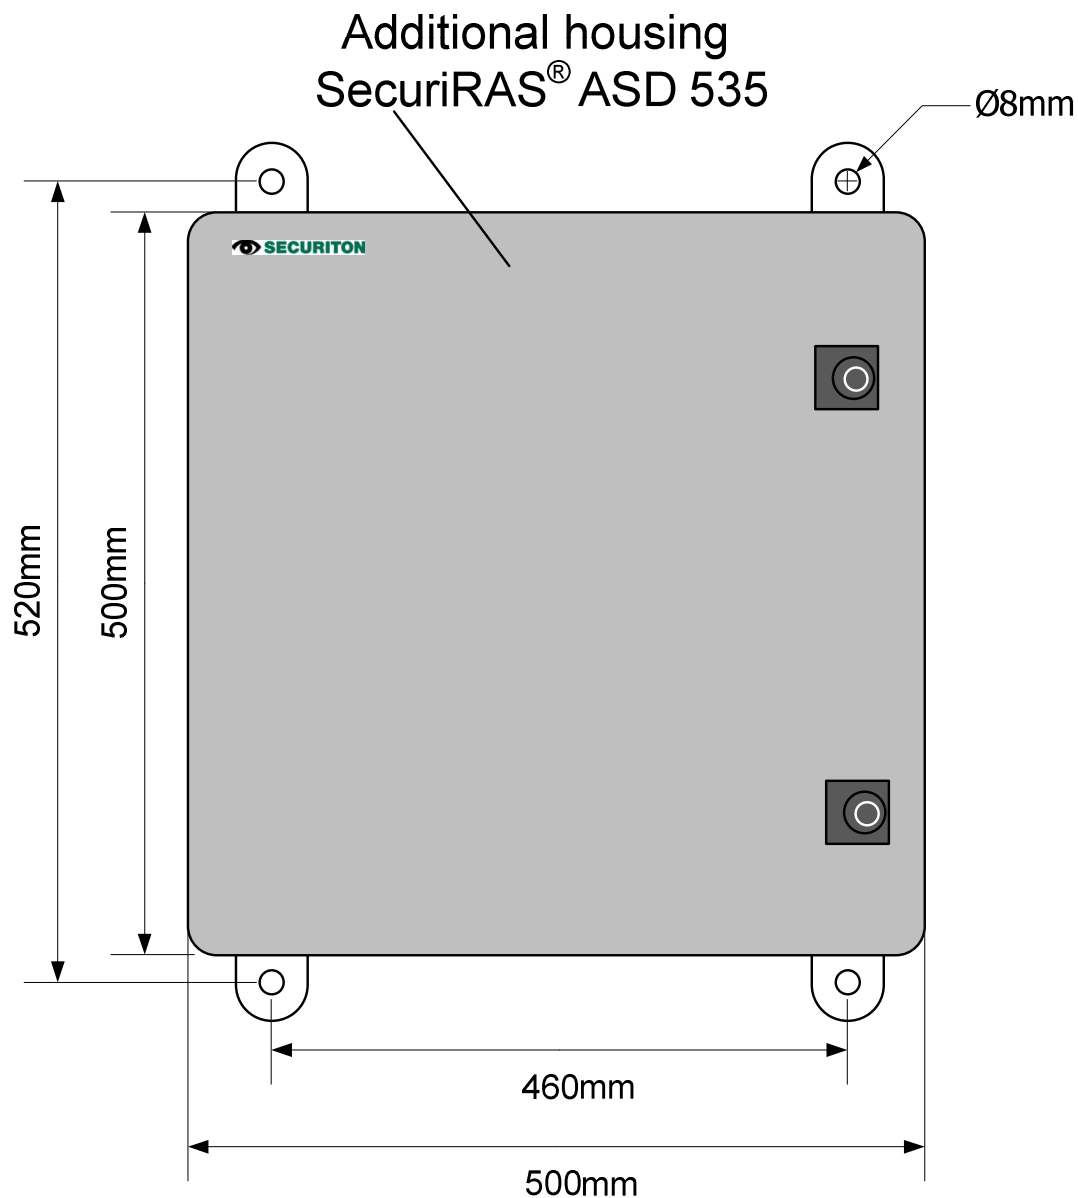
Dimensions of additional housing SecuriRAS® ASD 535 for wall mounting
